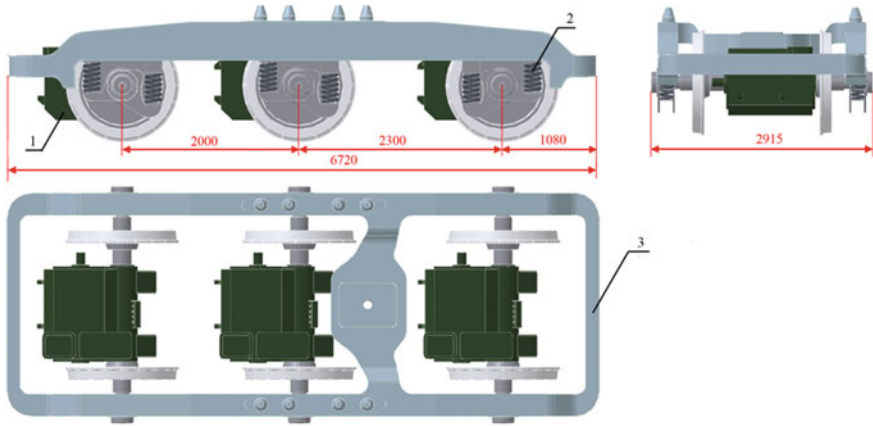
Structure of the bogie of the modernized diesel-electric locomotive TEP-70: 1—traction motor; 2—spring; 3—frame
